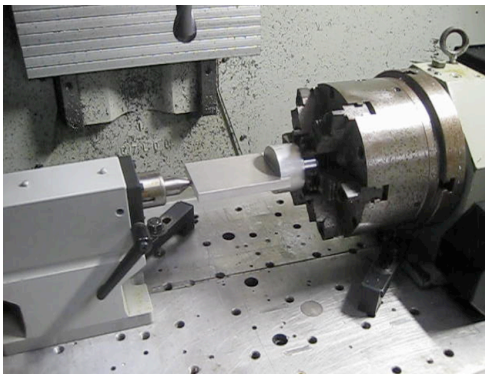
Pre-machined aluminum mounted in 4-axis CNC mill
